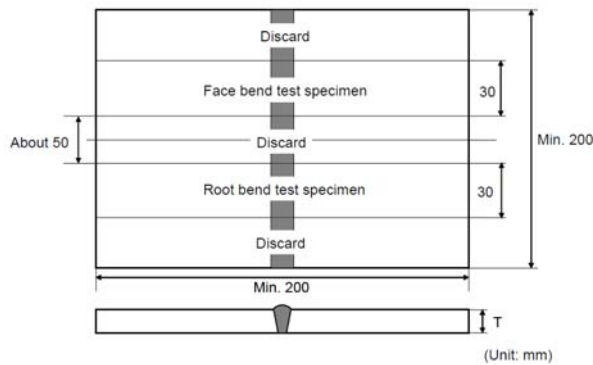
Dimensions and types of test assembly for butt welds
